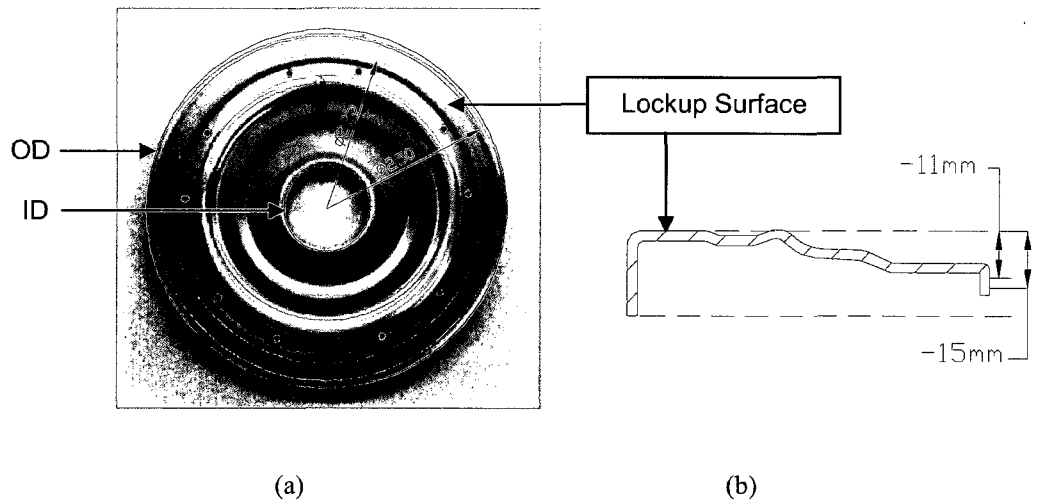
Torque converter piston geometry and distortion measurement positions. (a) Front view of piston with lockup surface highlighted in pink; (b) Half cross section of piston showing ID measurement positions at -11 mm and -15 mm from the lockup surface.
